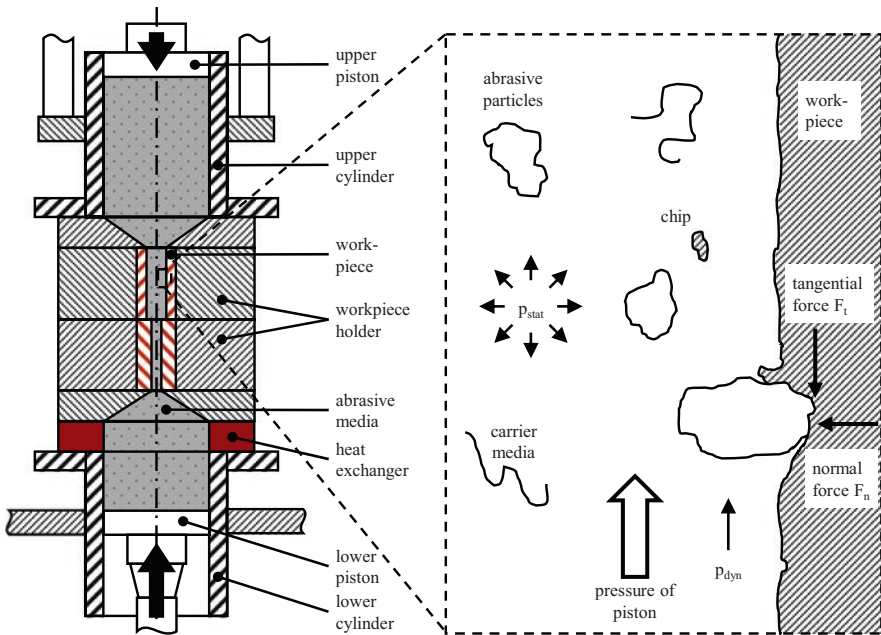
Machine technique and chip formation in abrasive flow machining [7]
